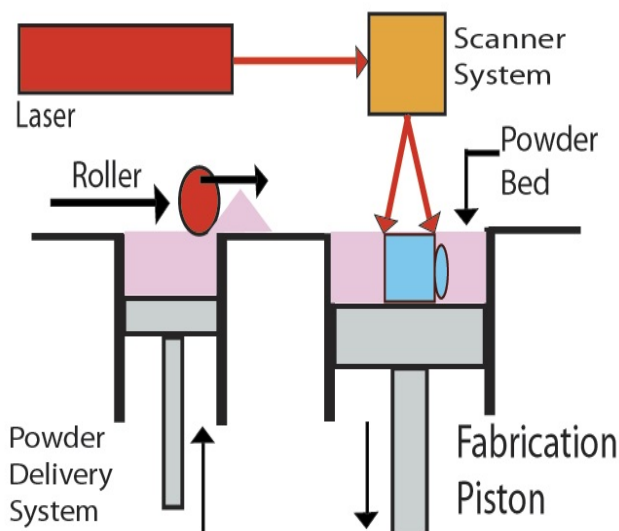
Selective laser sintering technique in 3D printing ⁹⁵
